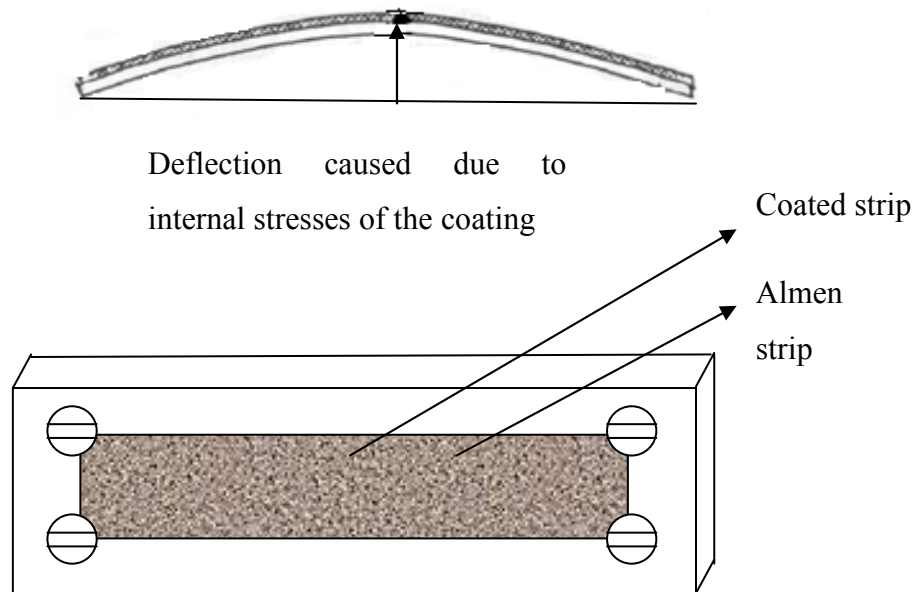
Illustrates typical Almen strip fixture, strip prior to coating deposition and after coating deposition (Adapted from J.P Sauer et al, 2001)
